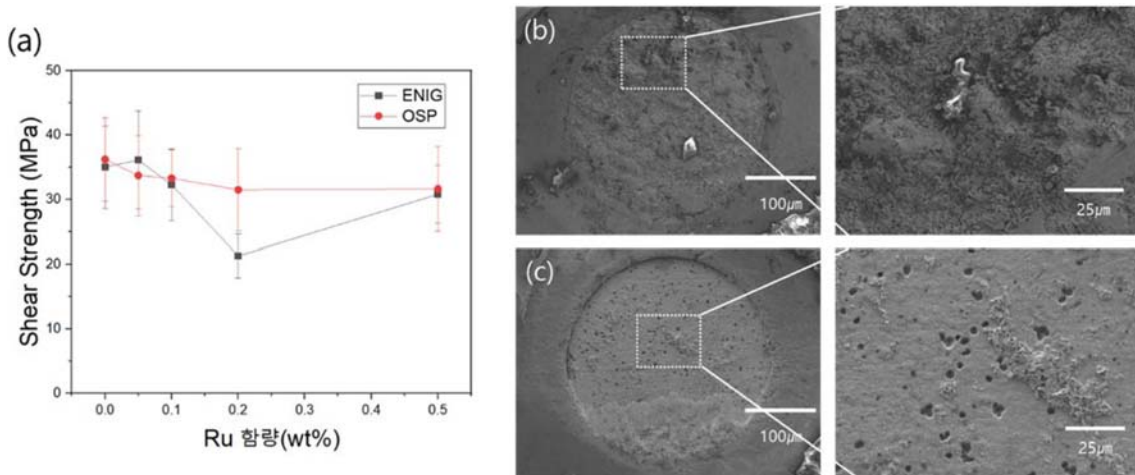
(a) Measured shear stresses of Sn-58Bi-xRu solder joints, (b) fractured surface of Sn-58Bi-0.2Ru/Cu OSP solder joint, (c) fractured surface of Sn-58Bi-0.2Ru/ENIG solder joint.
